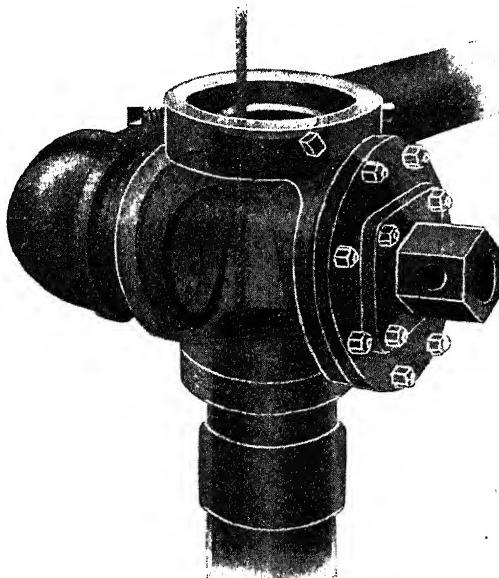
PHANTOM VIEW SHOWING TOP OPENING CLOSED TO DEFLECT FLOW INTO TANK. THE DRILLING LINE IS SHOWN IN POSITION IT ASSUMES WHEN VALVE IS CLOSED WITHOUT WITHDRAWING THE DRILLING TOOLS.
